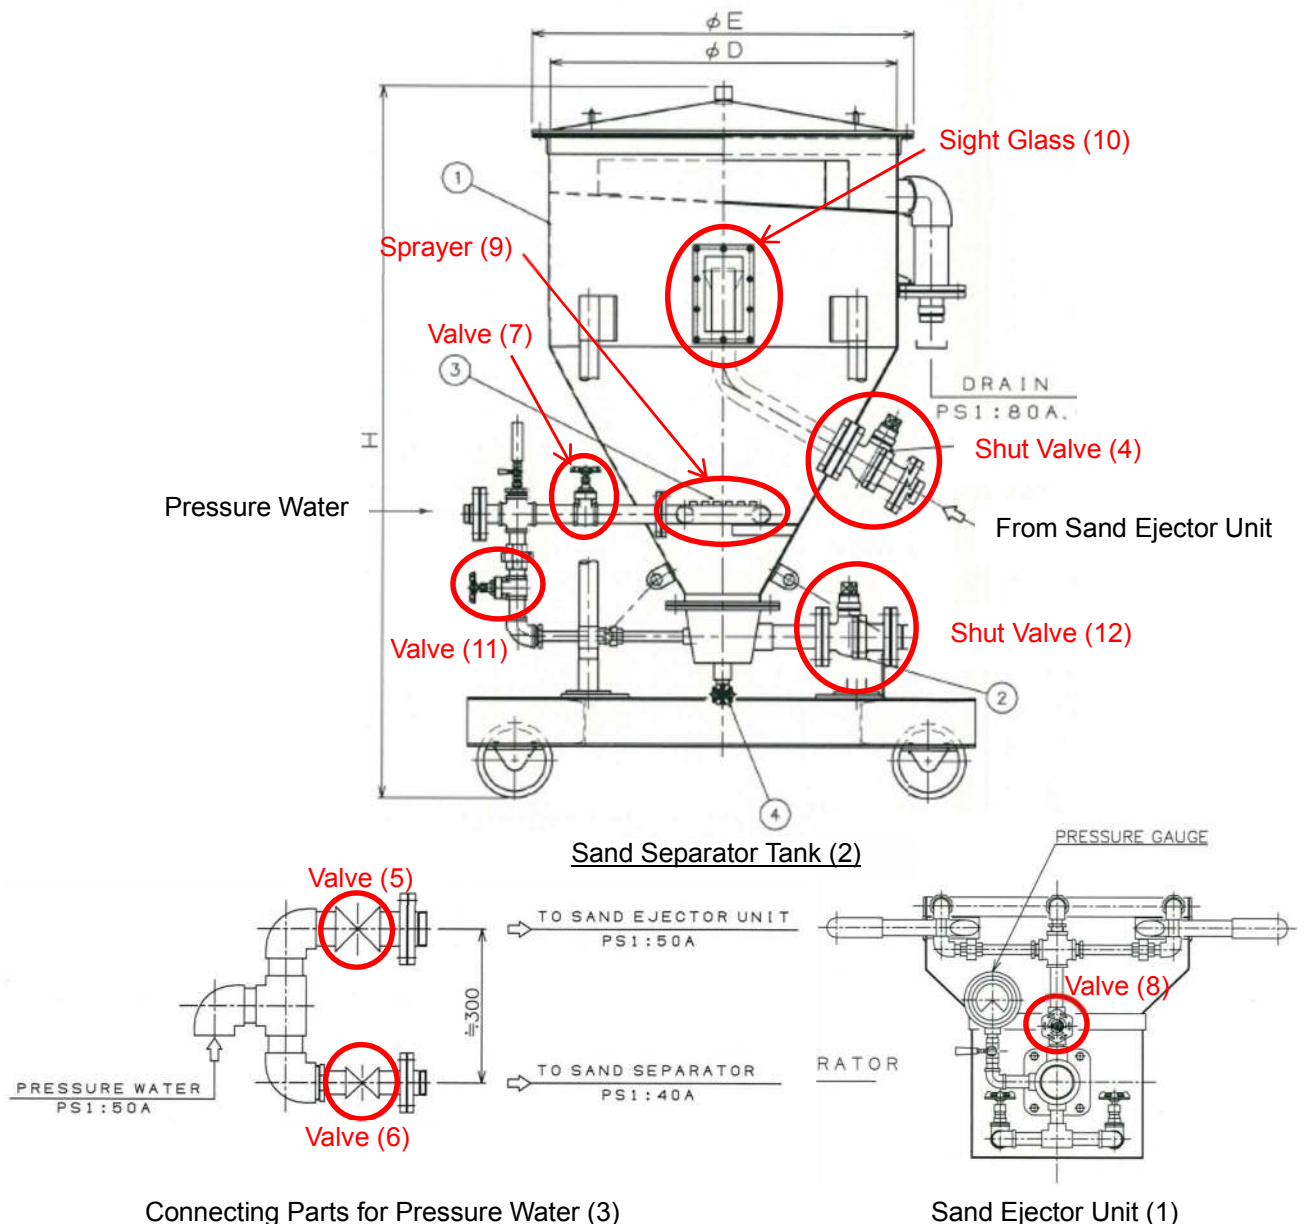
Details of Sand Ejector Unit, Sand Separator Tank and Connecting Parts for Pressure Water
